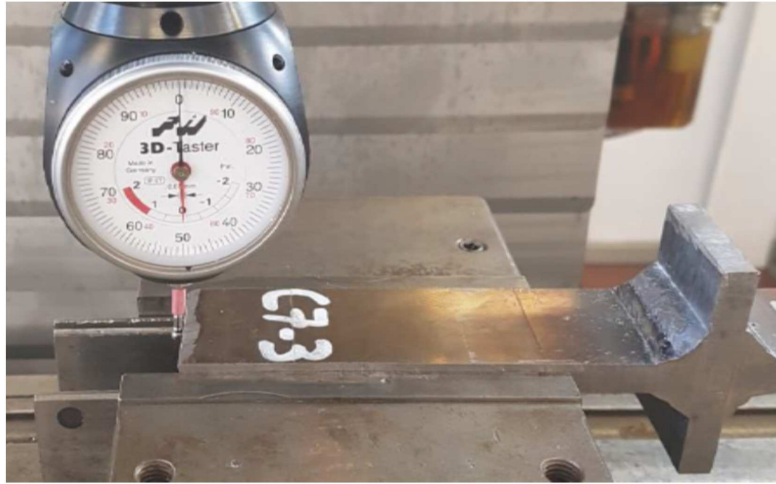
Reset of the X-axis at the edge of the welded joint [66].
